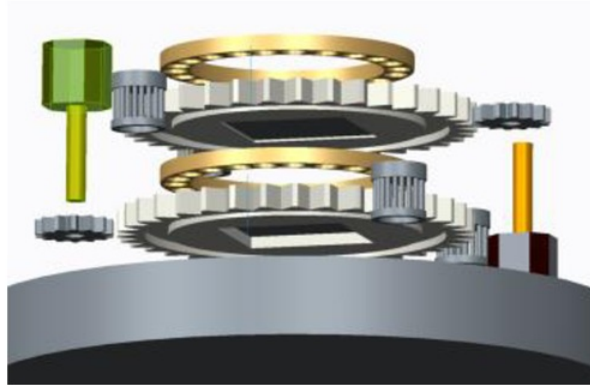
View for the final concept design shows the bearings and the bottom groove.
